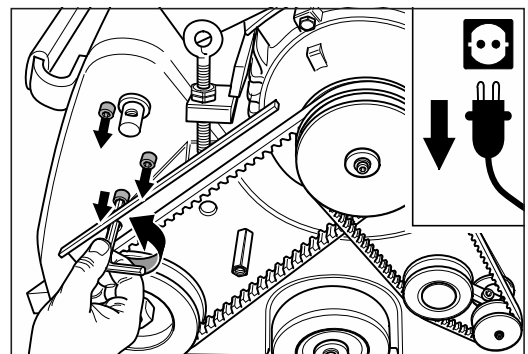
Release and remove the three fixing screws of the drive unit. Similar to figure.
